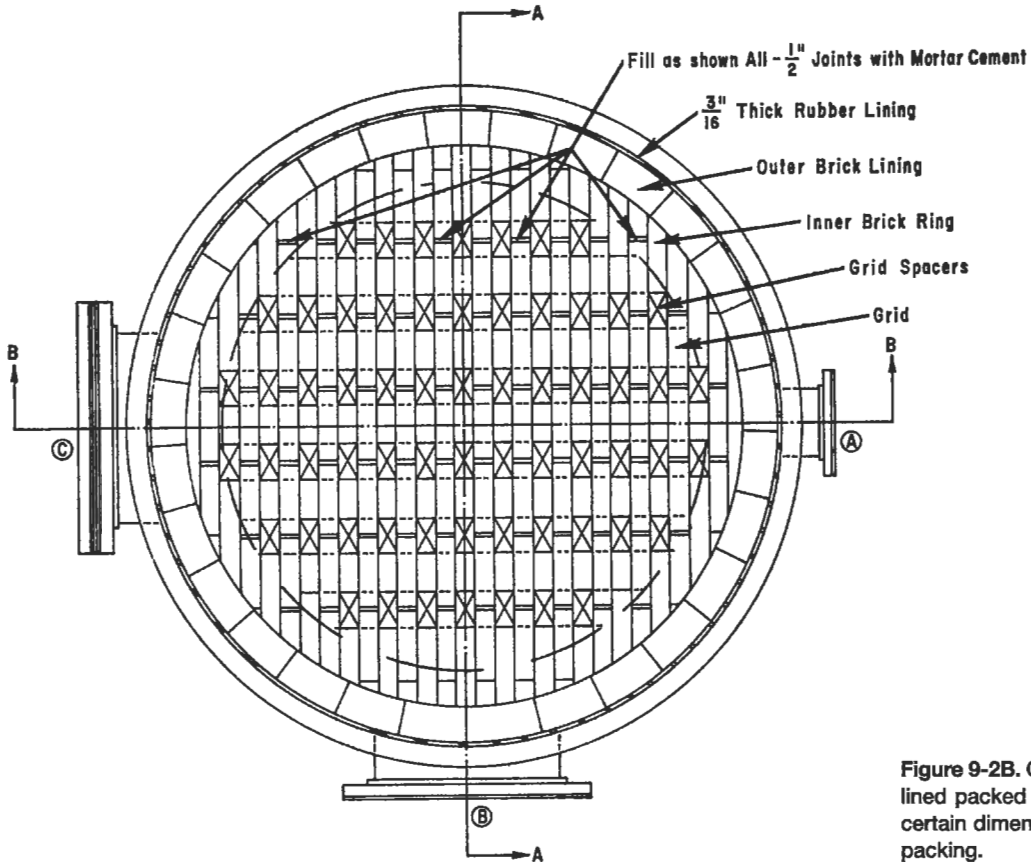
B. Cross-section of membrane and brick-lined packed tower. Depending on tower diameter, certain dimensions should be modified, particularly packing.
